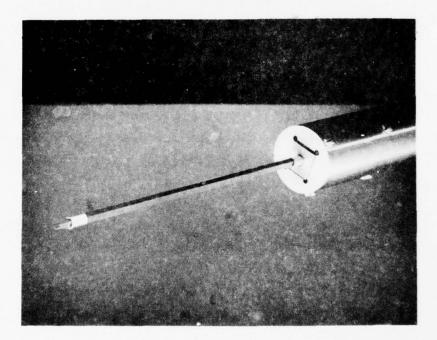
Pedestal Clamp Assembly and Pedestal with Dielectric Rod in Place for APS Deposition.
